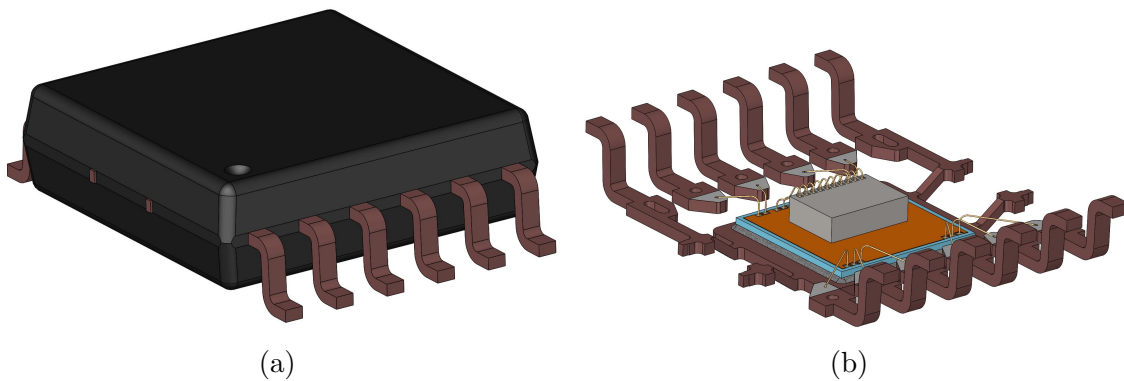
CAD model representation of subjects being tested herein (a) Complete assembly with overmoulded housing (b) Inverted bald frame representation without housing.
